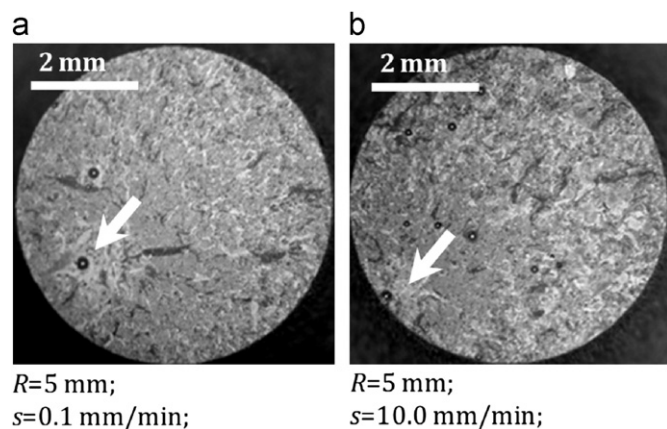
Comparison of the fracture surfaces: (a) at 0.1 mm/min and (b) at 10.0 mm/min.
